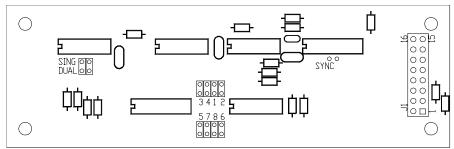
Universal Video Pre-Processor Board Jumper Locations – Part # 3698016
